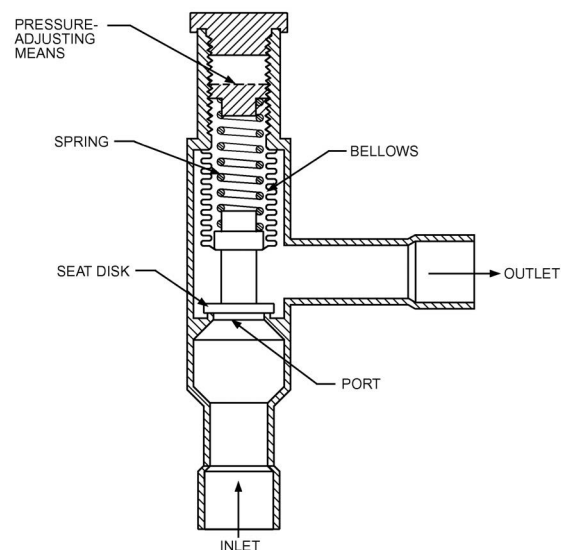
Direct-Acting Evaporator Pressure Regulator
